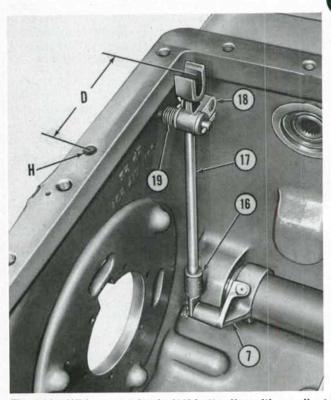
With eccentric pin (19) in "up" position, adjust link (17) by turning link into or out of link end (16) so that distance (D) between center of dowel hole (H) in rear axle center housing to center of draft control lever yoke is 5-5/8 inches (143 mm).
